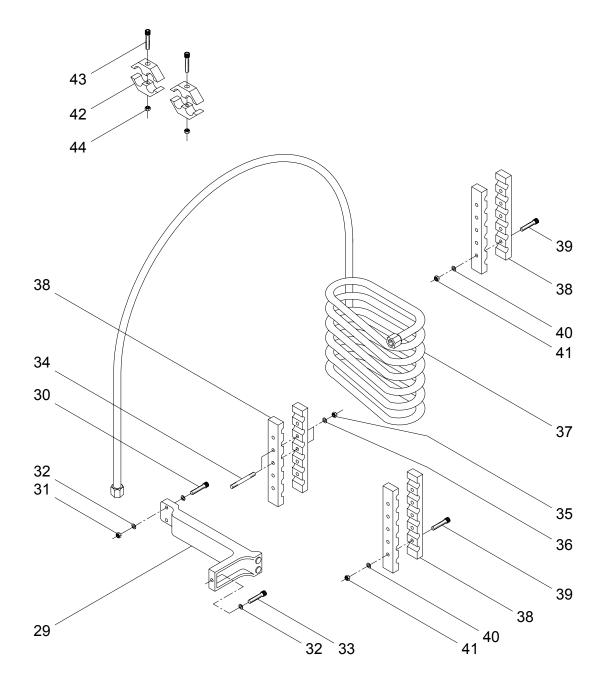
Compressor Block Assembly (Sheet 1 of 17)
